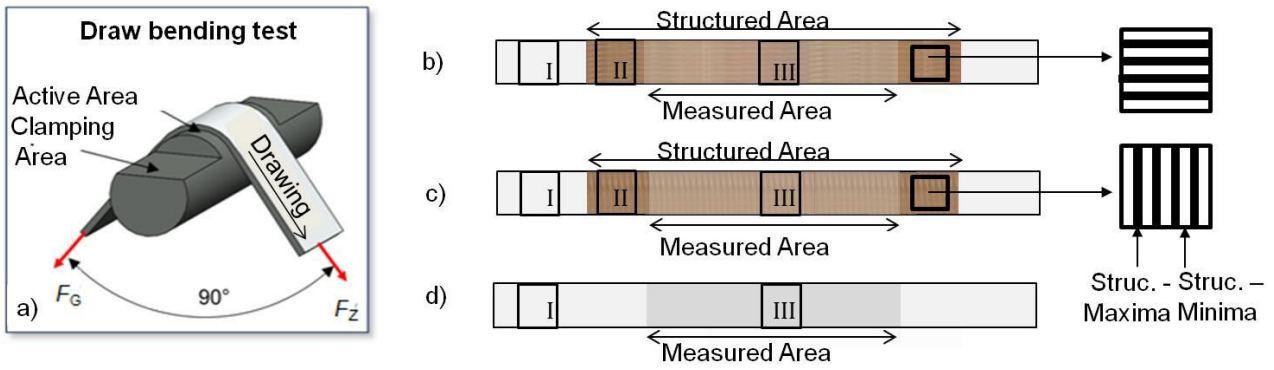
(a) Draw bending test setup with the metal stripe drawn over the active area of the tool. The metal stripes were differently treated with the DLIP method, obtaining periodic lines which were (b) longitudinal or (c) transversal to the drawing direction. (d) Also the unstructured reference surface was evaluated.
